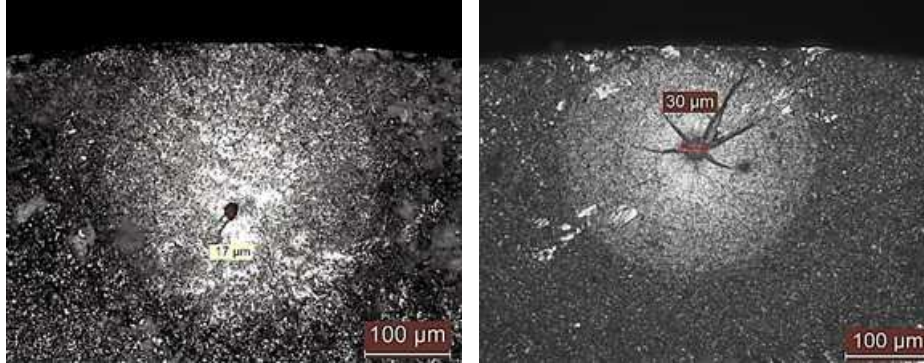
specimens fracture surface, crack nucleation points: S1 (left) and S2 (right)
